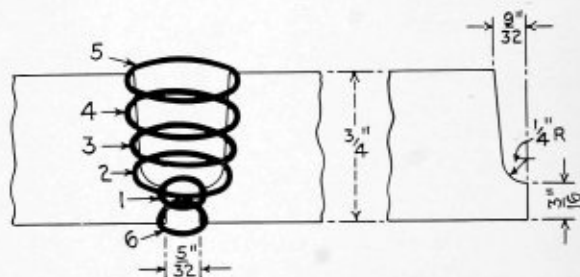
Butt weld in 3/4-inch plate in which six beads of weld metal are required. The joint is scarfed in preparation for welding and the weld metal is mostly filler material
